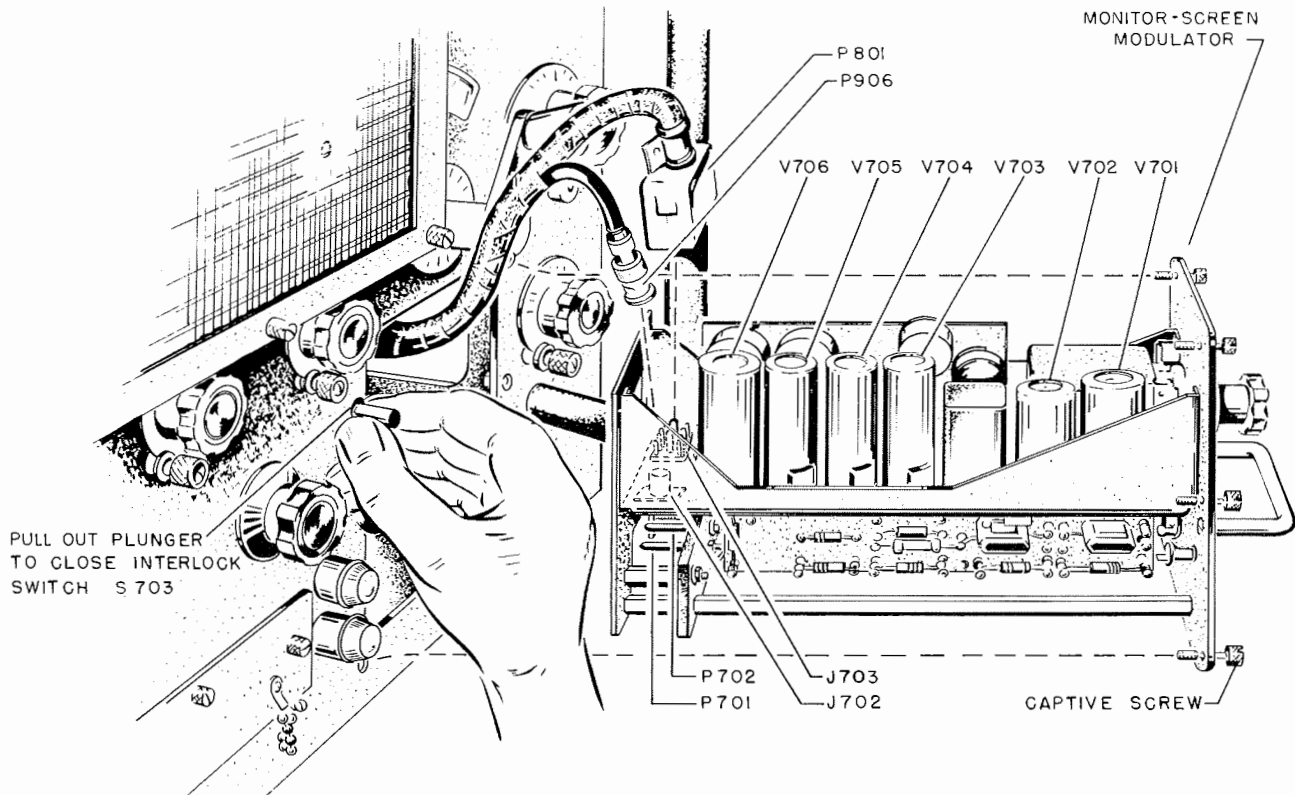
Radio Transmitter, Removal of Monitor-Screen Modulator Assembly and Tube Location
